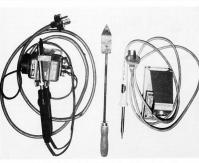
Soldering irons for transistors, leaky guttering and valve wiring.
